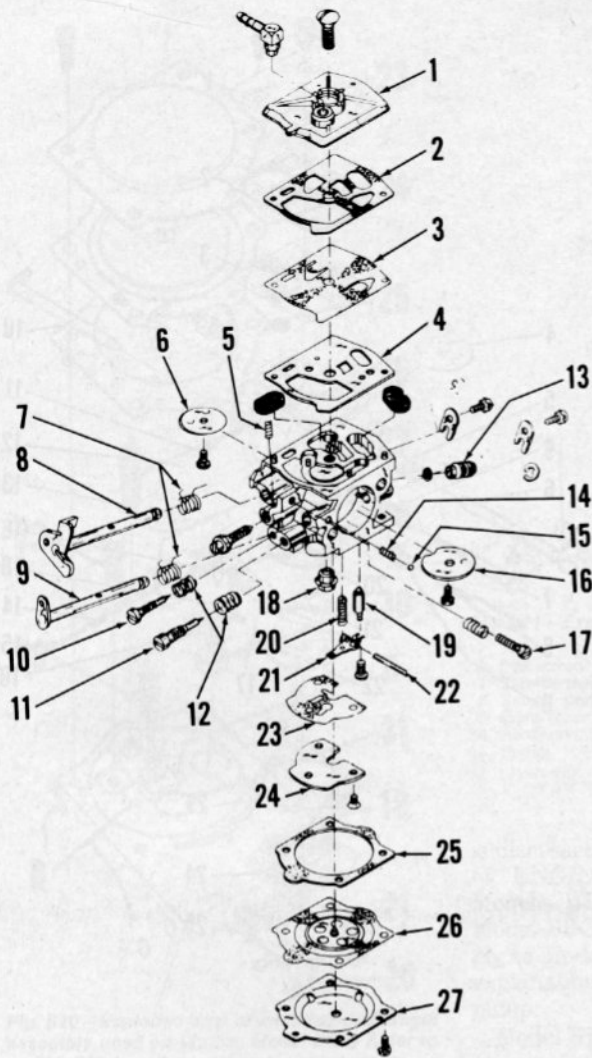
Exploded view of Walbro WS diaphragm carburetor.
